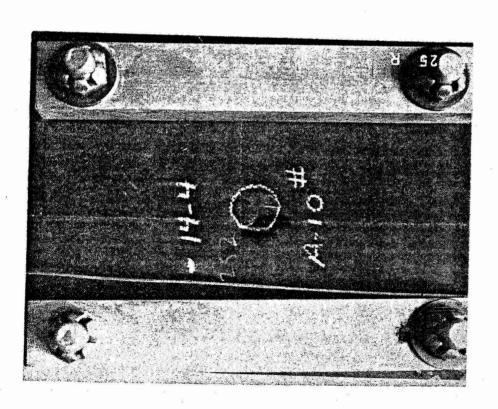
Impact Side Leakage of a 47-Ply AS4/3502 Panel Impacted At 10 Ft.. Lbs. With a Fuel Pressure of 5 psi.
